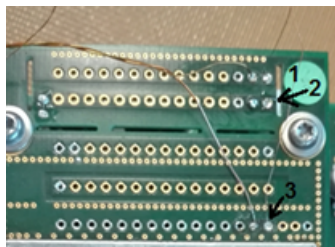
PCFH thermocouple module board soldering pads: (1) thermal equilibration of Ko wire; (2) electrical connection of Ko wire; (3) electrical connection of Cu wire.
